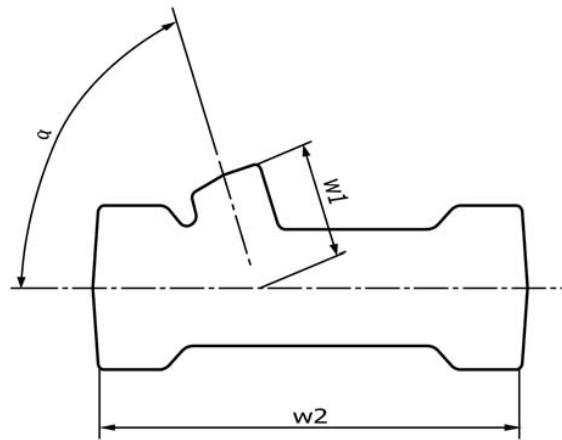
Shorter Leg Example for Angular Tolerances
